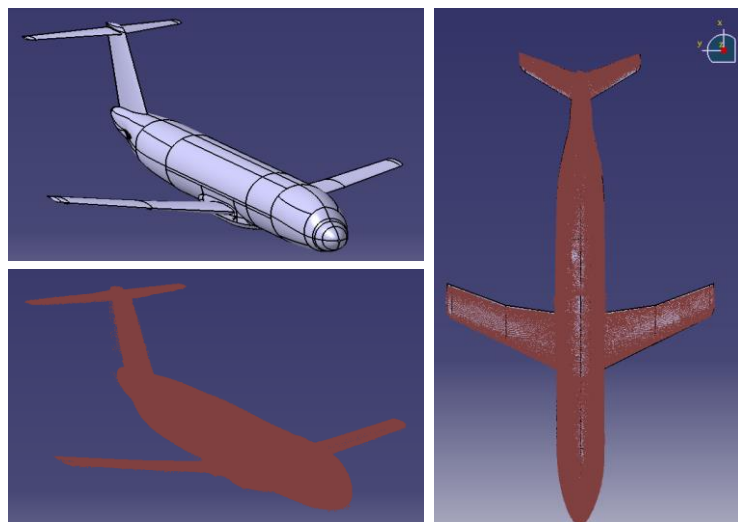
CAD test model (top-left), cloud of points of manufactured model (bottom-left), and superposition of CAD and manufactured models (right).
